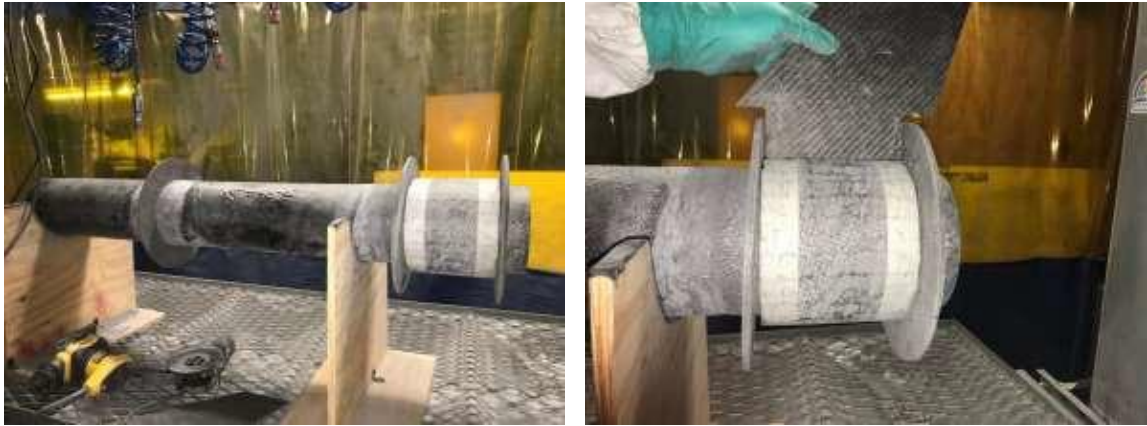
Fabricated motor tube after completion of the sanding and grinding processes [62]
